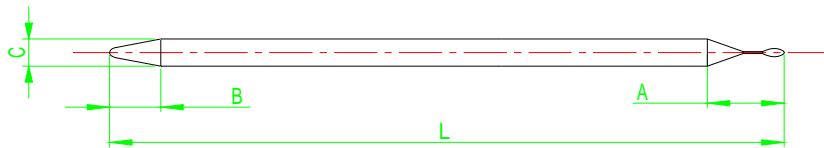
Npowertek Sinter Heat Pipe Dimensions
